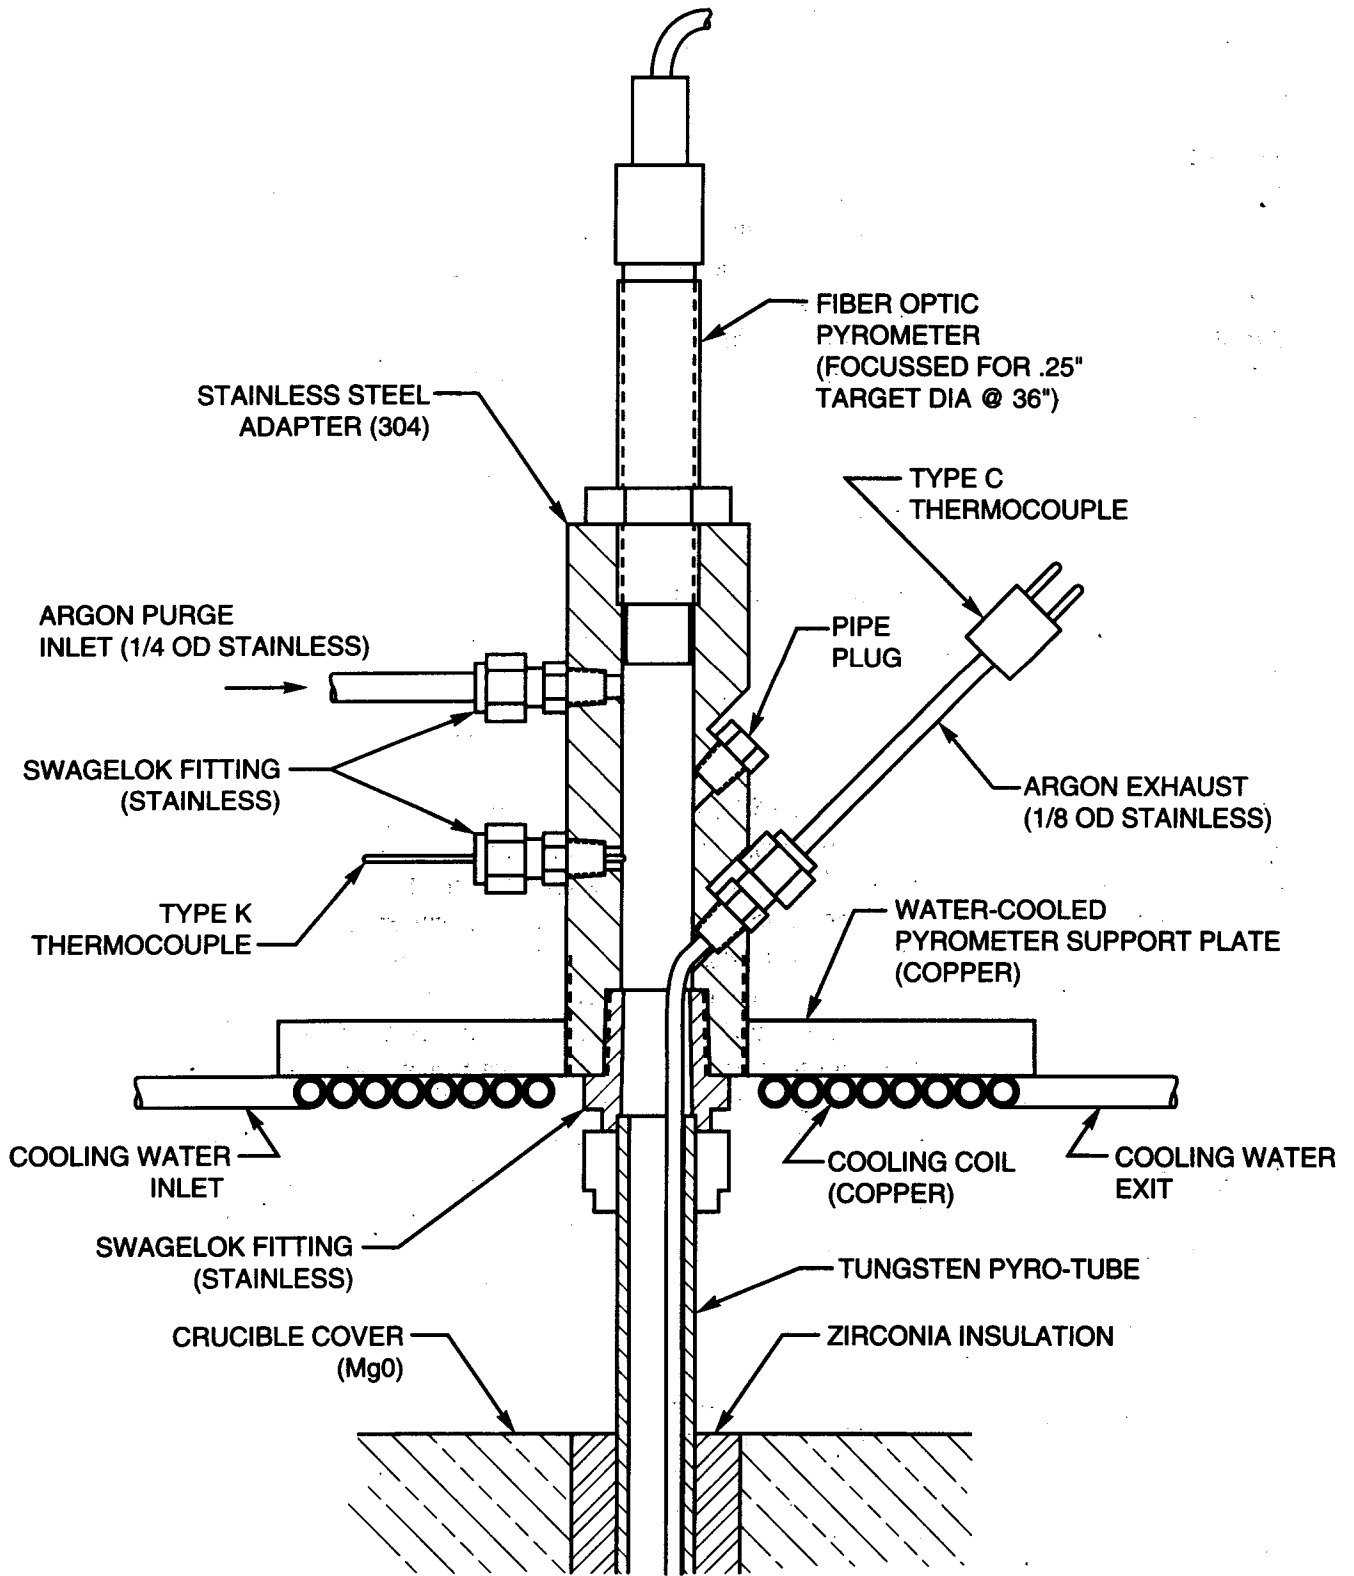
Schematic of fiber optic pyrotube assembly
